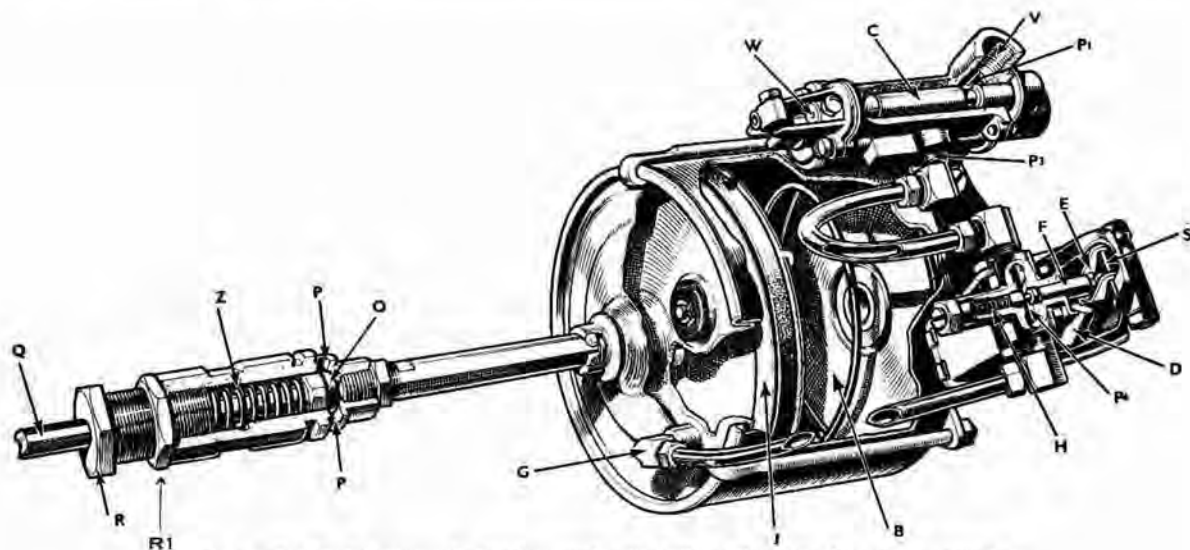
The Bendix automatic clutch control unit partly sectioned to show its construction.
